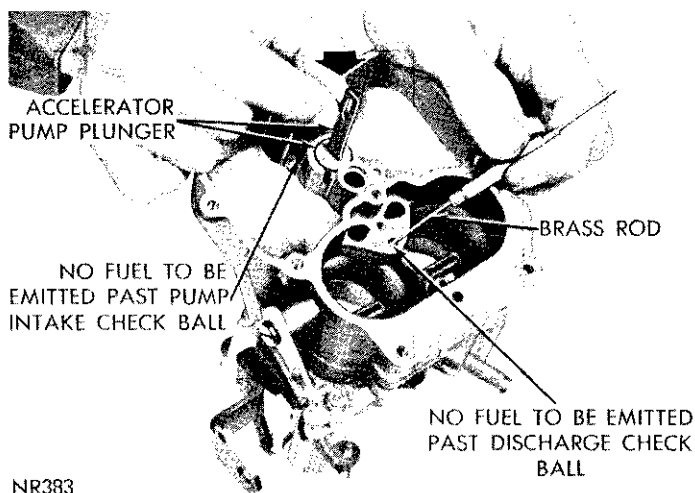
Testing Accelerator Pump Intake and Discharge Check Balls
